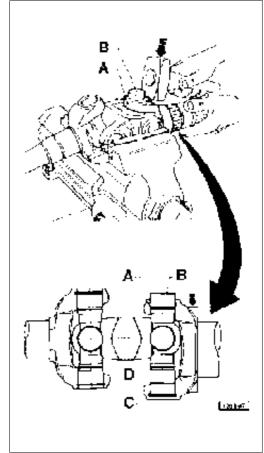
Disassembling the twin-type universal joint from the axle shaft.
